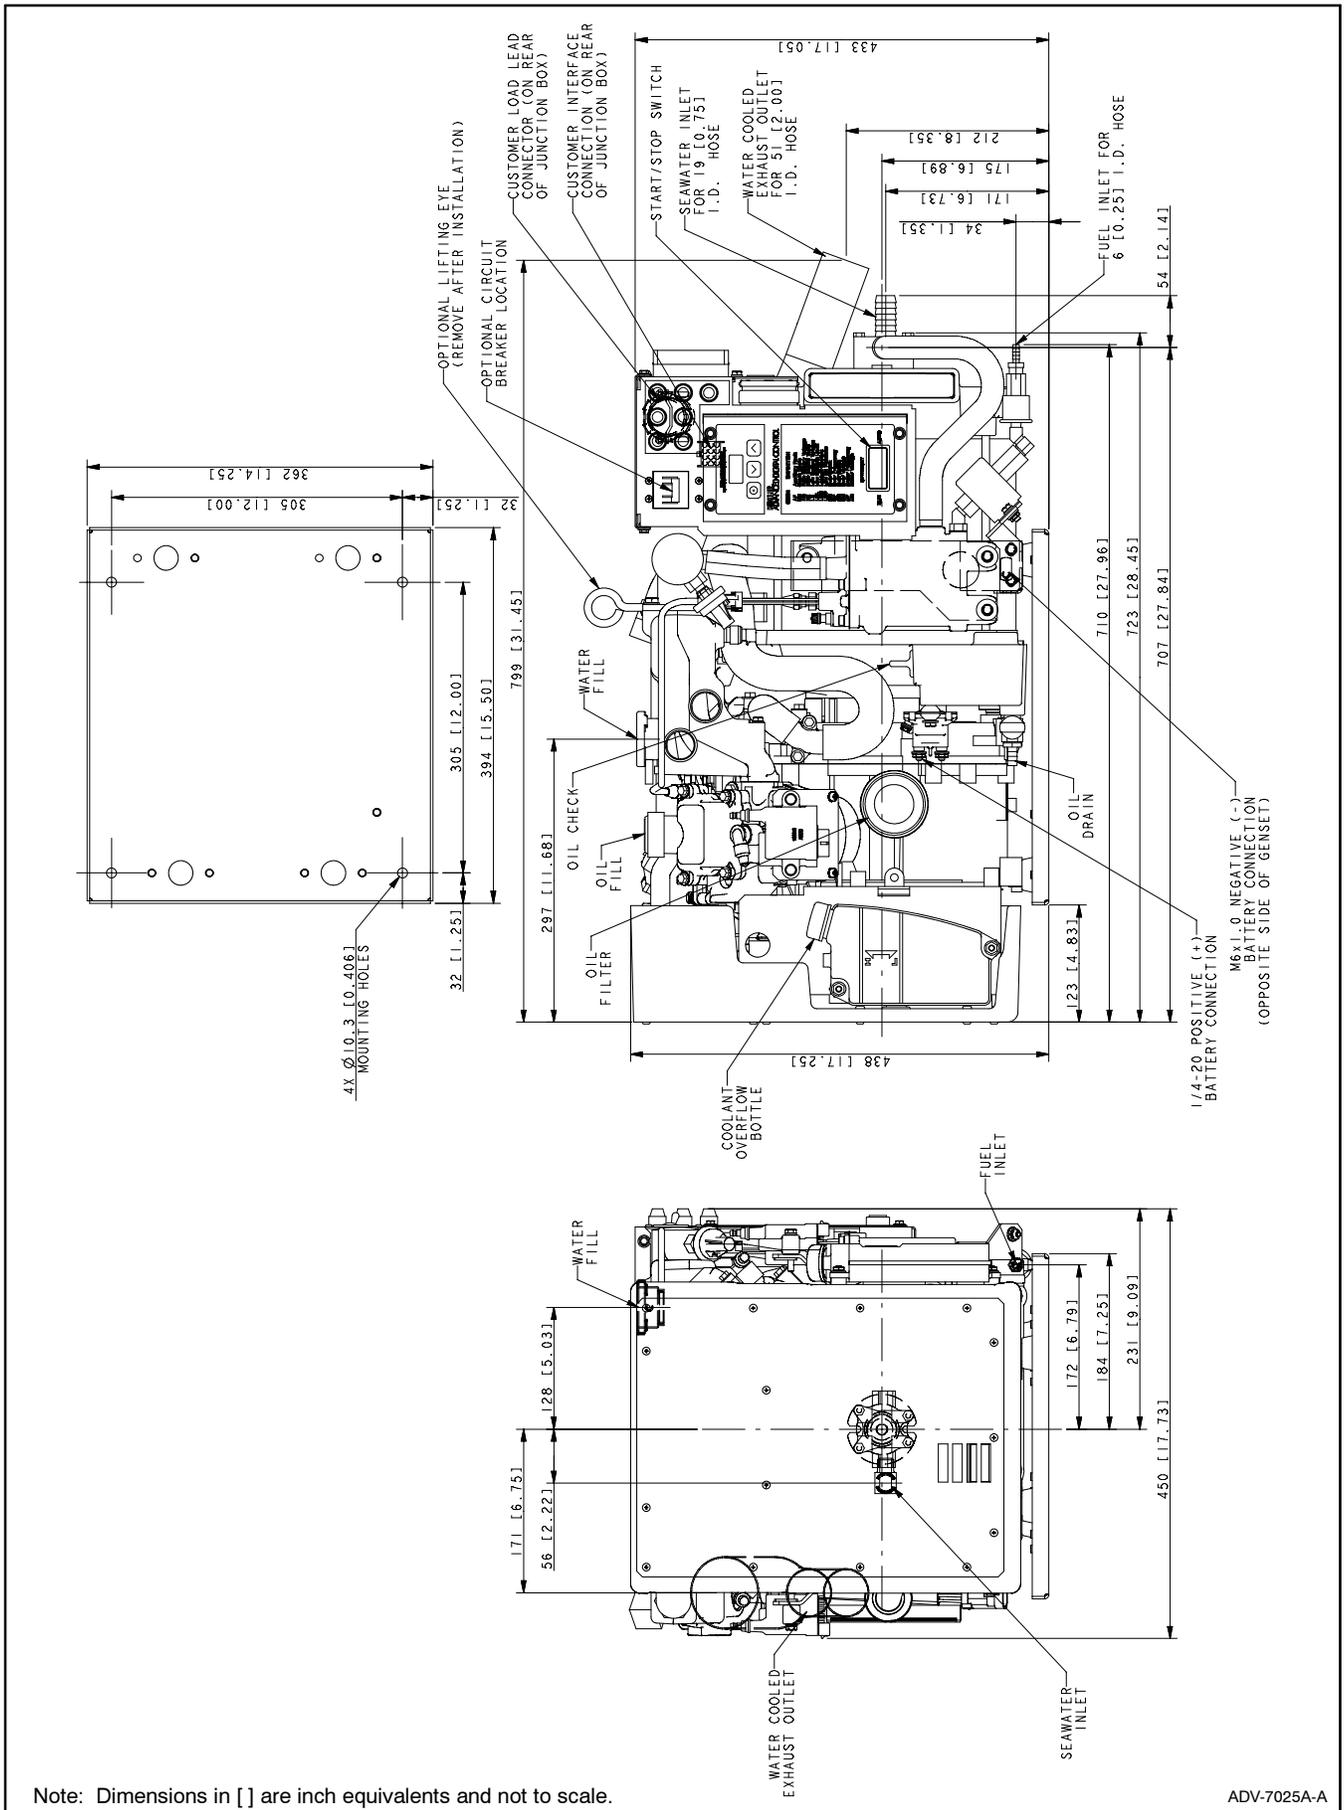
Dimension Drawing ADV-7025A-A, 5/7.3ECD and 4/6EFCD Models
